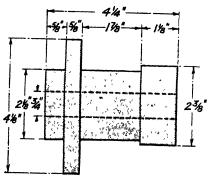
DIMENSIONS OF PHOSPHOR-BRONZE VALVE-ROD GLAND CASTING BEFORE MACHINING Showing the casting as it is delivered to the operator.
